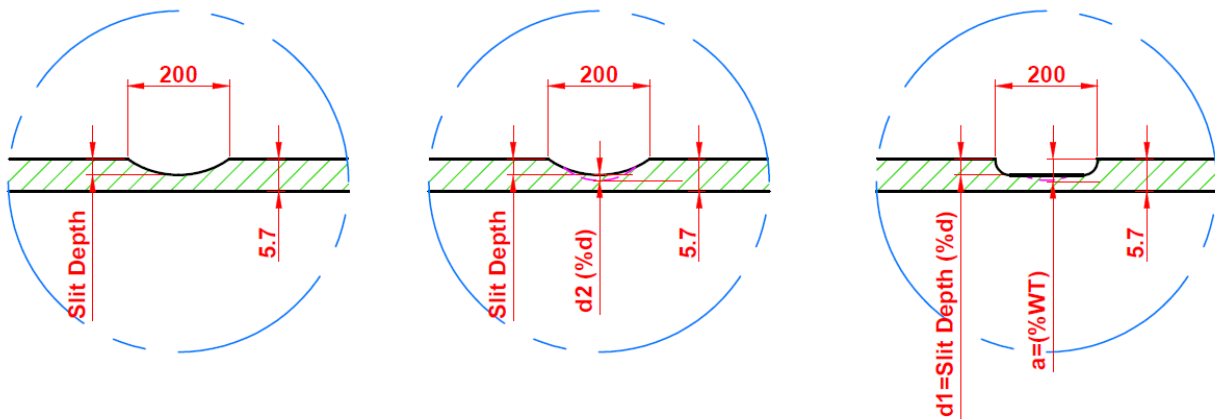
CIC Flaw Manufacture a) Cut slit, b) Fatigue crack and c) Corrosion flow [73]
